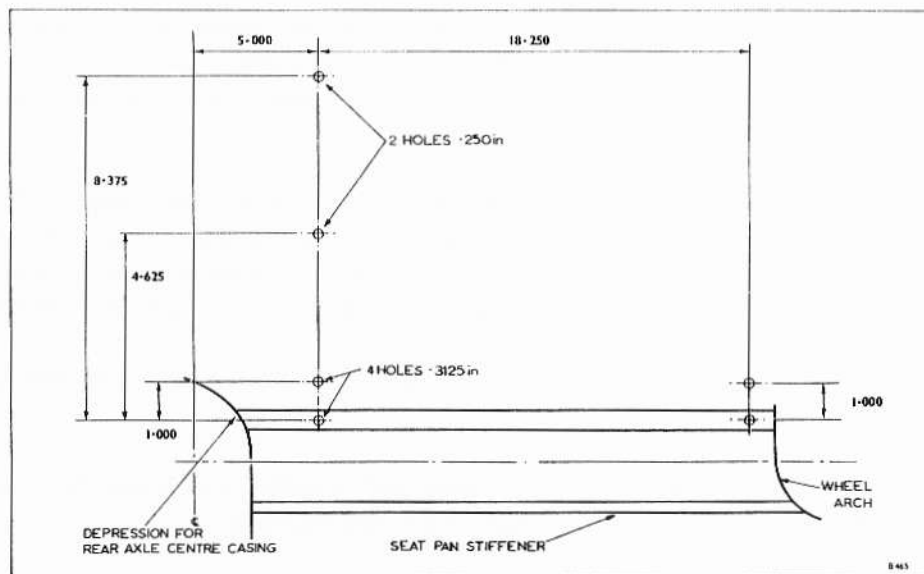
Dimensions for drilling holes for rear seat 'U' bolts.
